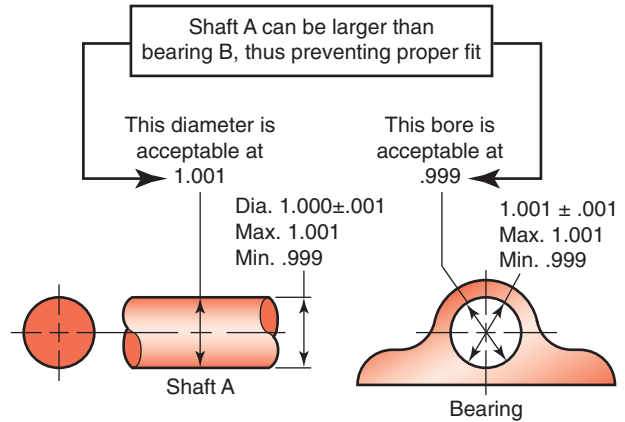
Tolerance overlap can prevent proper fit of mating parts.
